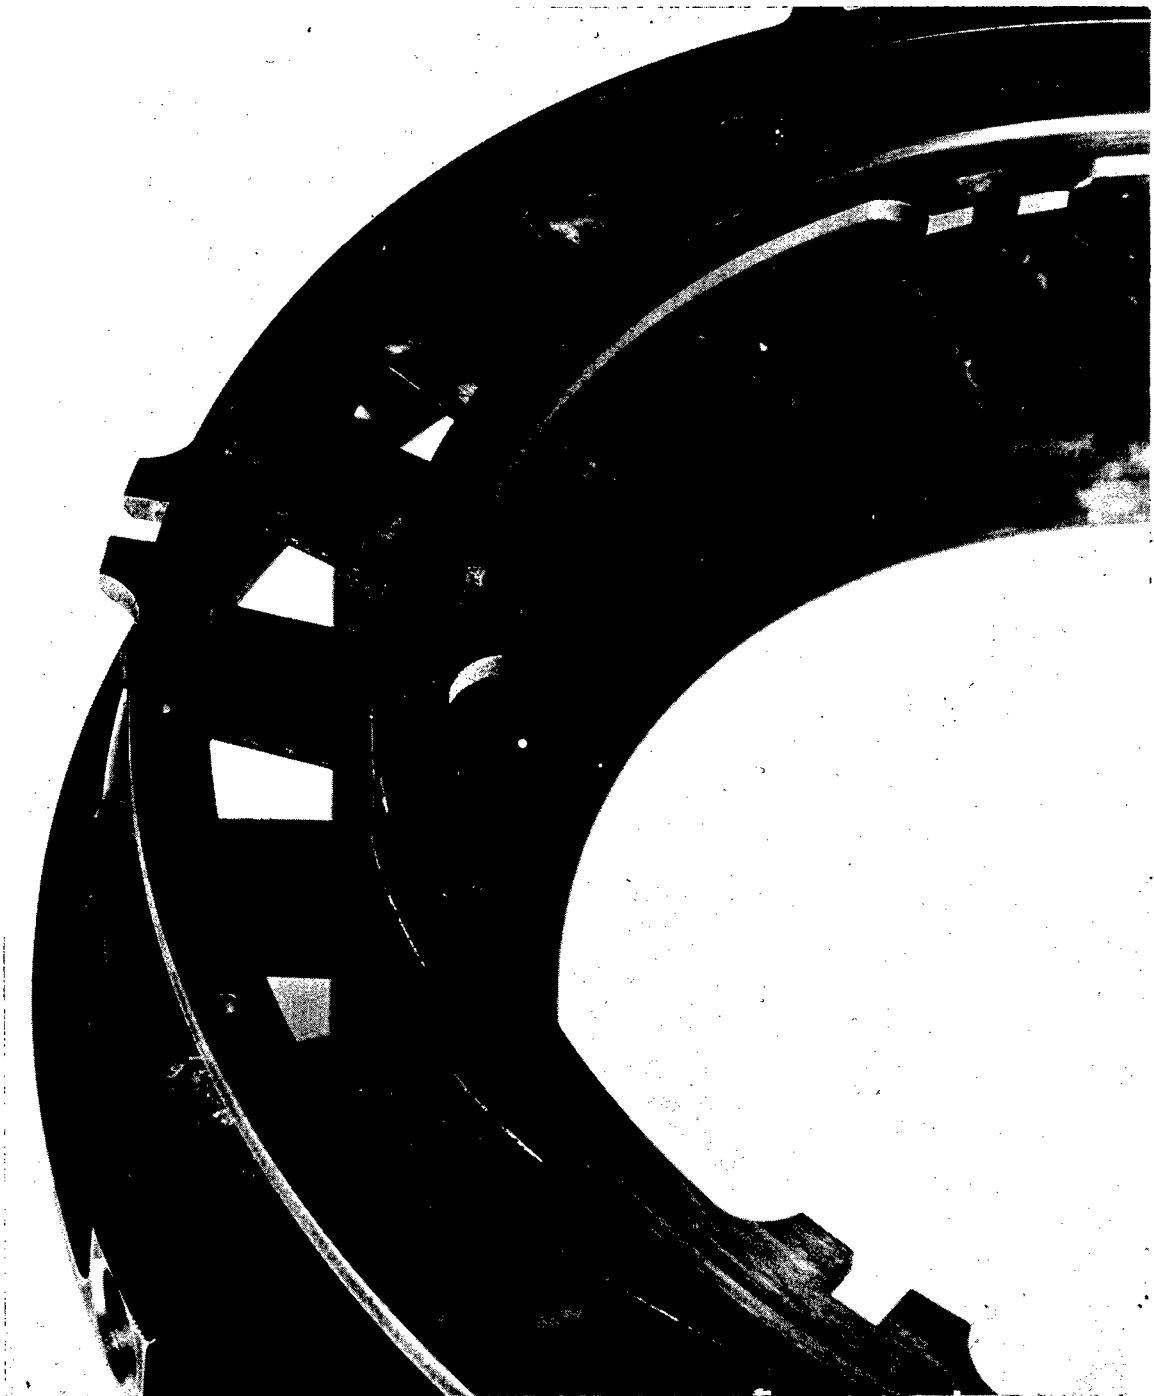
Trailing-Edge Slots, Air-Cooled Nozzle.
